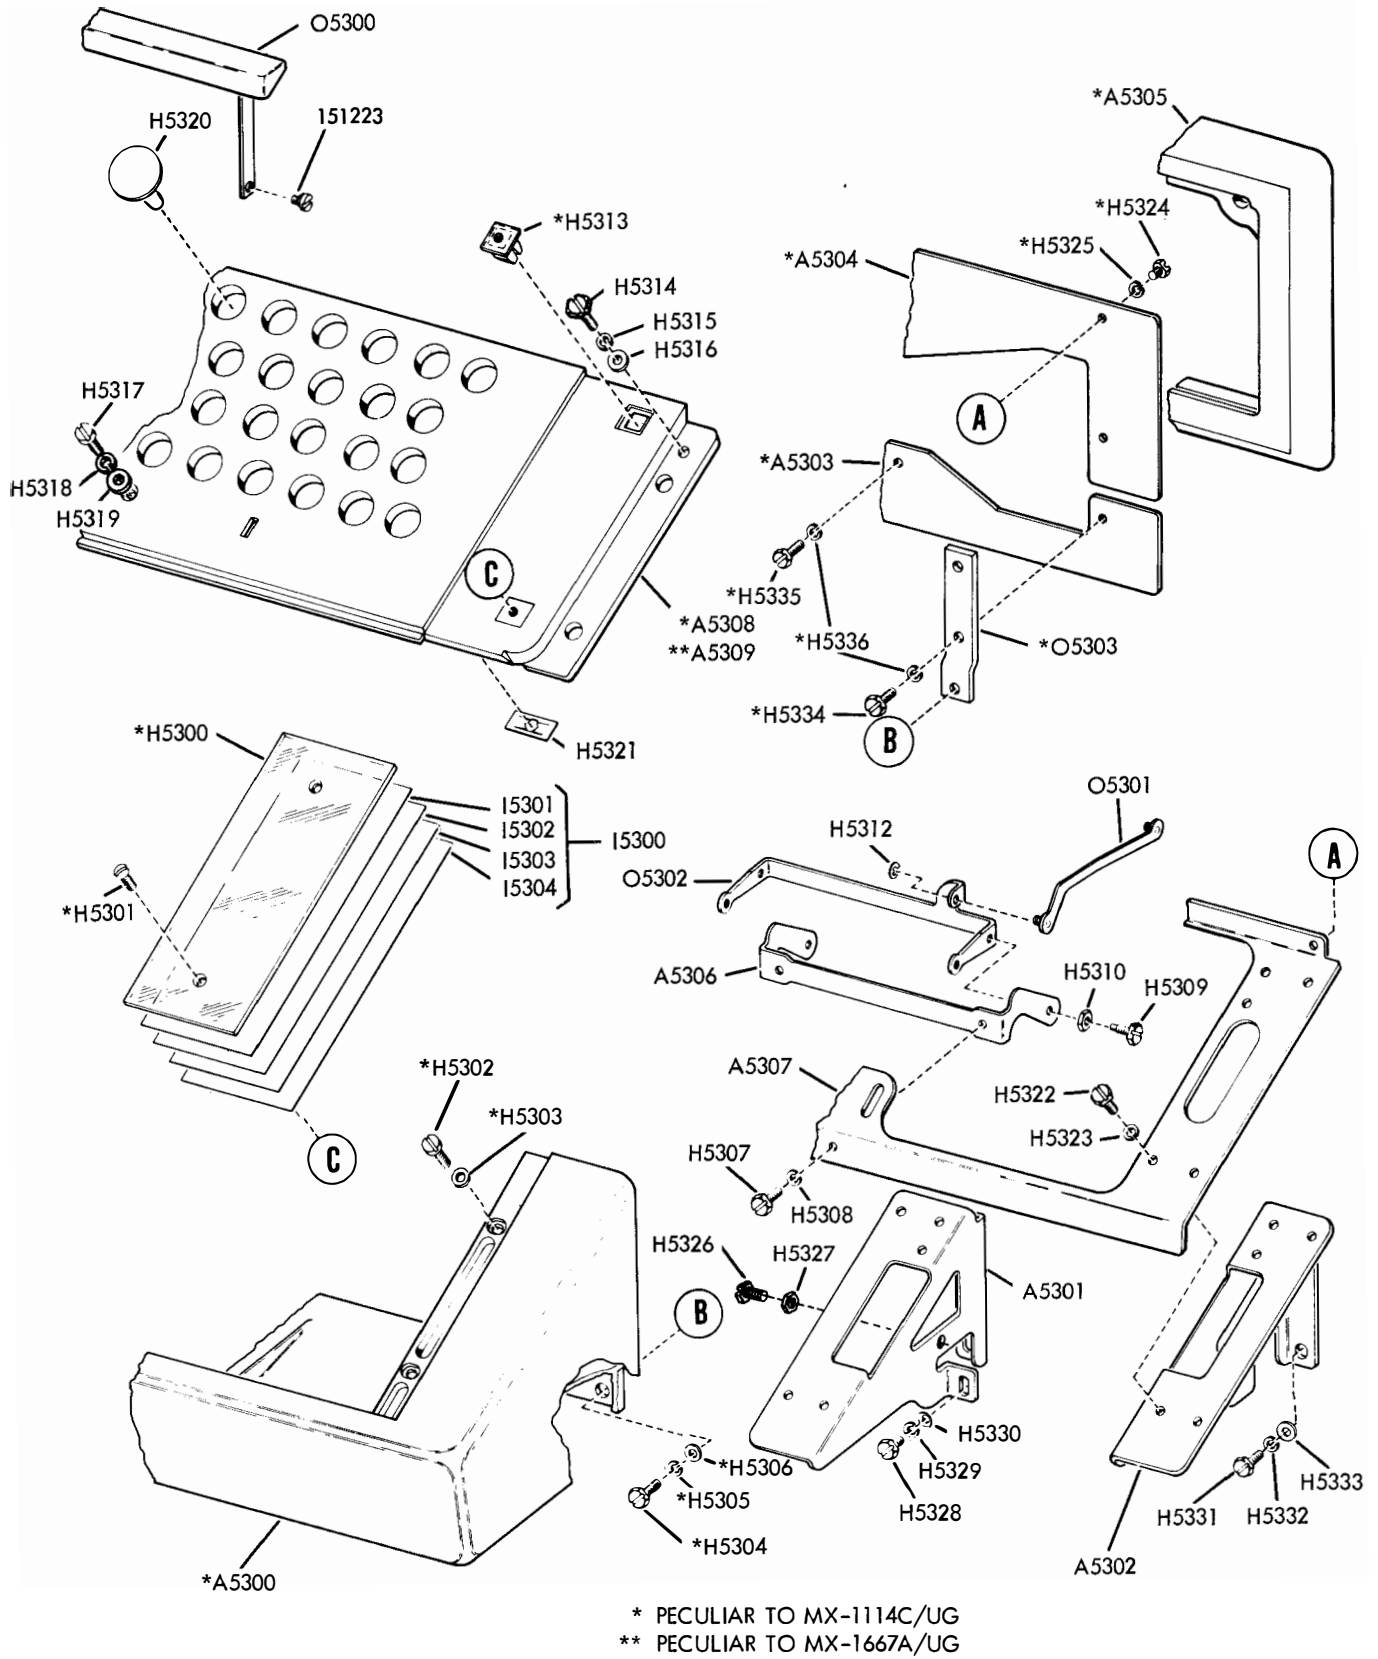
A. Keyboard Mechanism MX-1114C/UG and MX-1677A/UG
